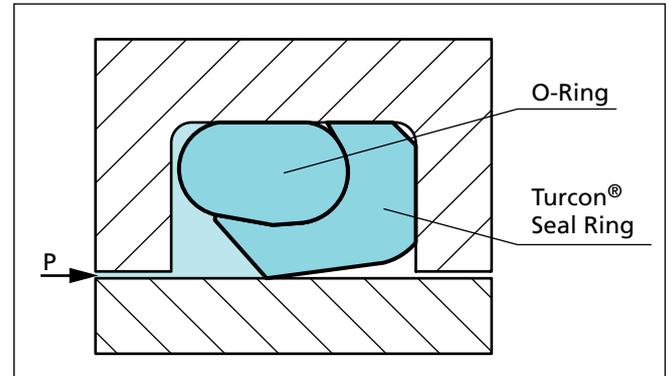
Turcon® VL Seal® mounted in O-Ring groove
